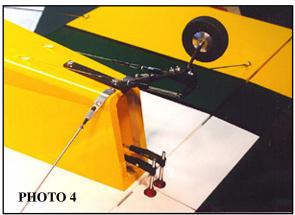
shows the aft end of the elevator pushrods threaded into Du-Bro 4-40 clevises. These are their new molded nylon clevises with a slider that locks the removeable clevis pin in place. The control horns are Sullivan Super Horns, which are basically 8-32 bolts with a special aluminum base and molded nylon connectors. Note: If you make the stab removable, you must also make it easy to disconnect the elevator pushrods, the rudder cables, and the tail braces.
